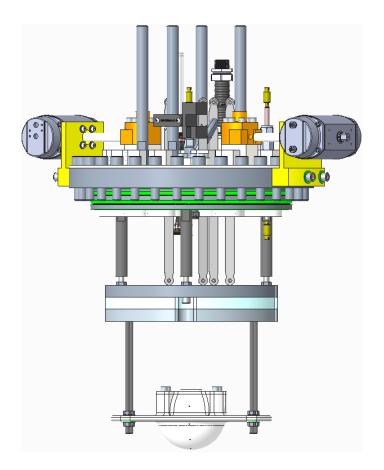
Example of HE Support Assembly attachment to Racklito that is connected to the Top Cover.
